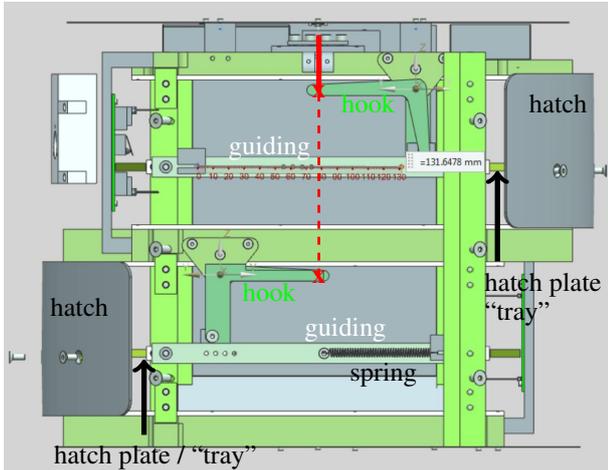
WOLF ejection system. The cable of the upper ejection mechanism is indicated by a red thick line, whereas the cable of the lower ejection mechanism is indicated by a dashed red line. The mounting positions of the tensioning cables at the hooks are marked with x. Adapted from [3].
